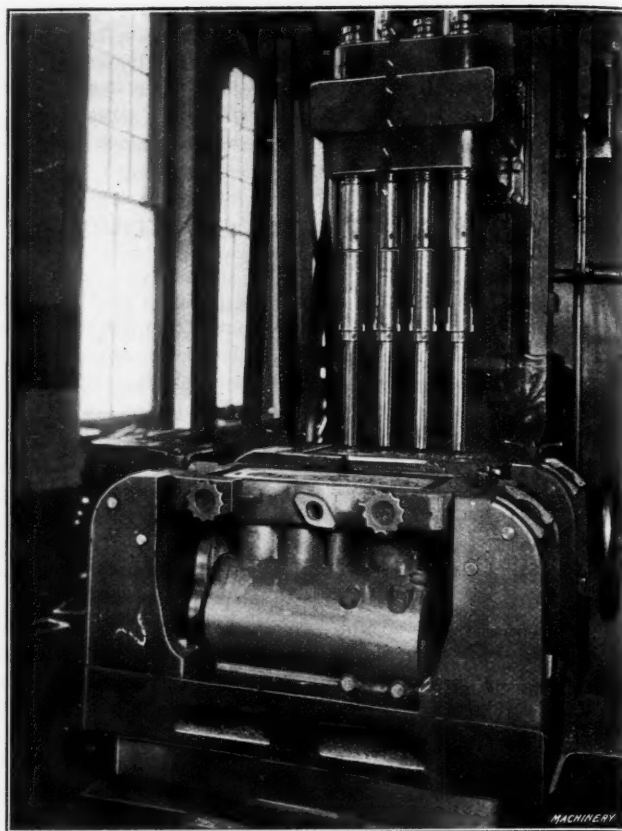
Type of Fixture used in the Plant of the Sterling Motor Co., Detroit, Mich., for holding Four Cylinder Castings while boring and reaming
